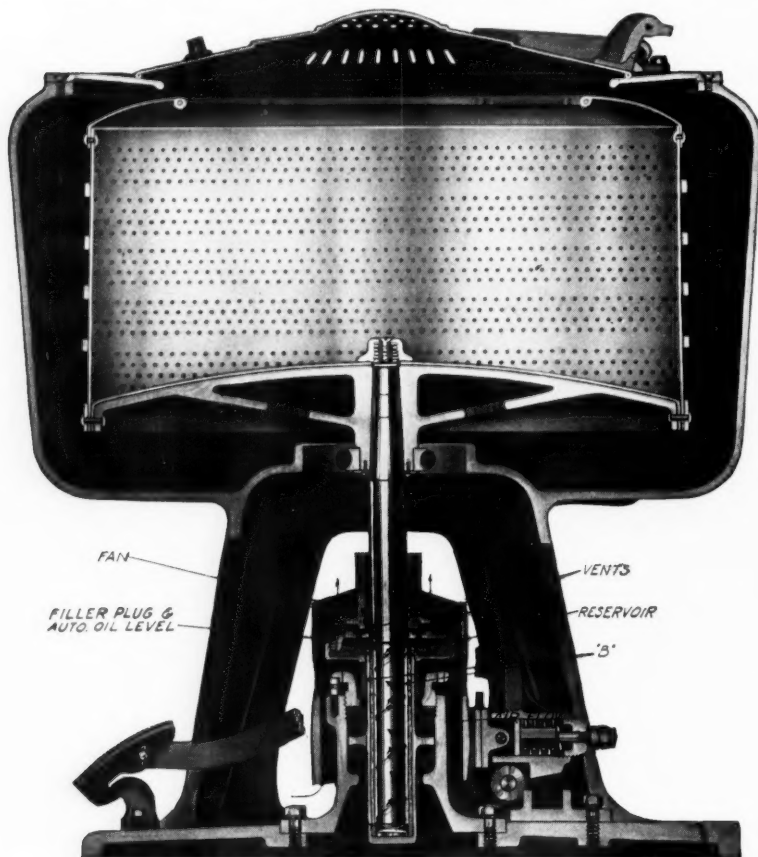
Sectional view of the Troy Vertical Motor Driven Marathon Extractor. One of the features of this machine is automatic oil circulation from the top reservoir, as shown, down through two holes on the sides of the bearings, indicated at "B". Basket spindle is lubricated by pumping action of the spiral groove cut in the spindle bushing, oil flowing upward as indicated by short arrows. The long arrows indicate flow of air to the fan at the top, which maintains low operating temperatures within the element. By this means marked temperature reductions have been attained. Driving motor is of the ball bearing type.
